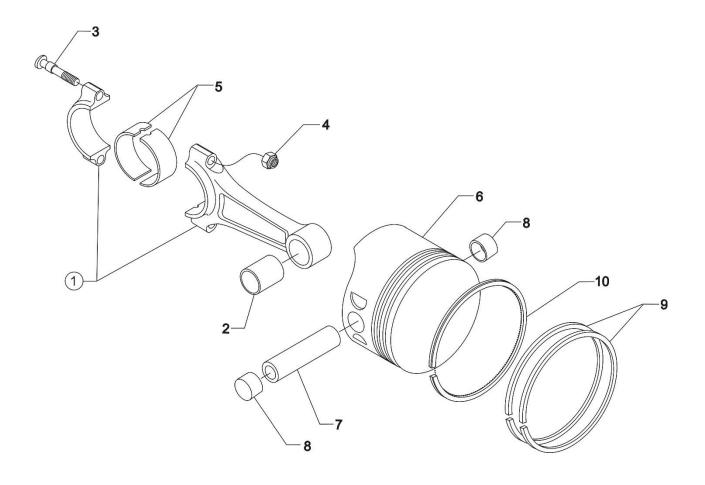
Connecting Rods, Pistons and Ring Assemblies
